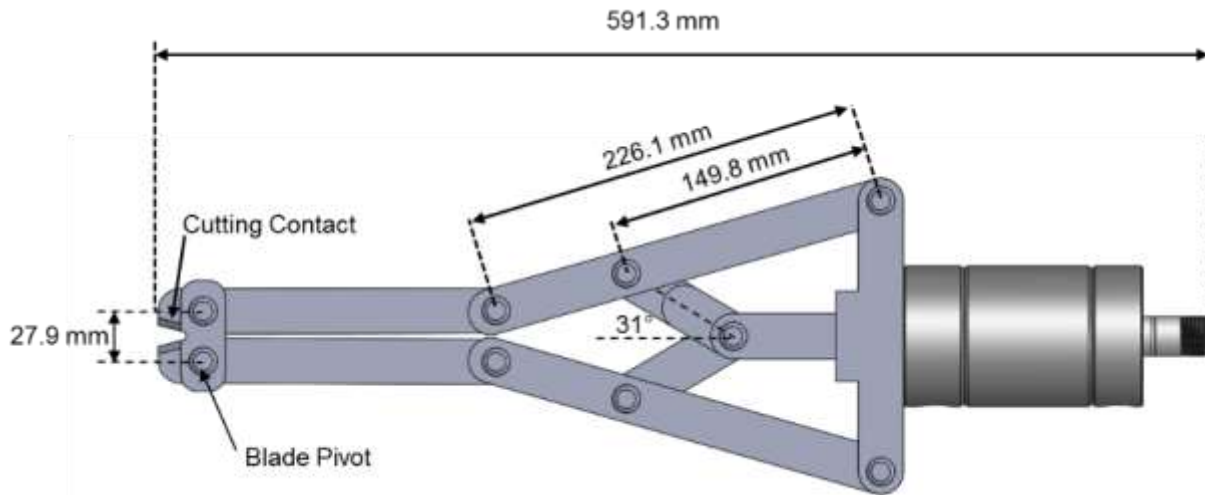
Bolt cutting design shown in its *opened* state, top view
